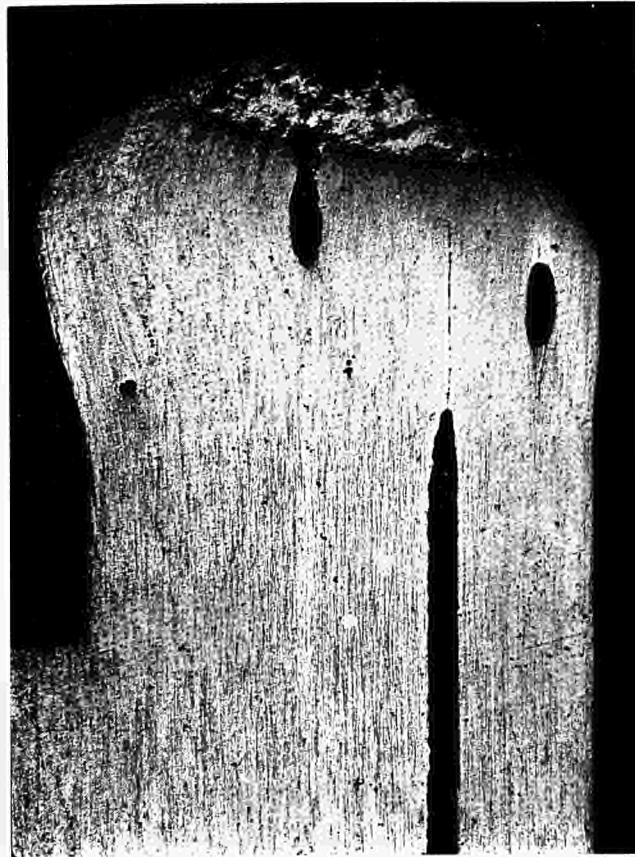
End-plug type a - welding of S.A.P. Montecatini 930 undegassed. ($\times 25$)
